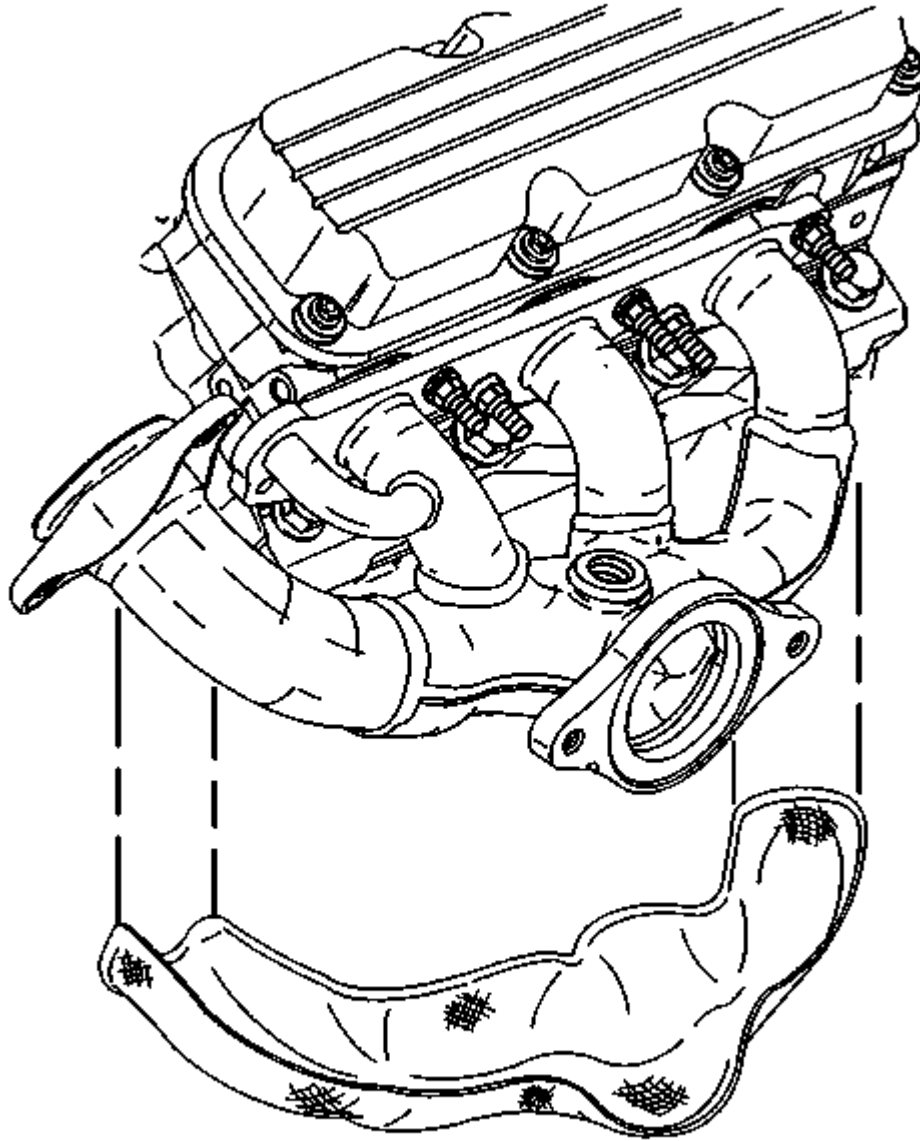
Installing Lower Right Exhaust Manifold Heat Shield
